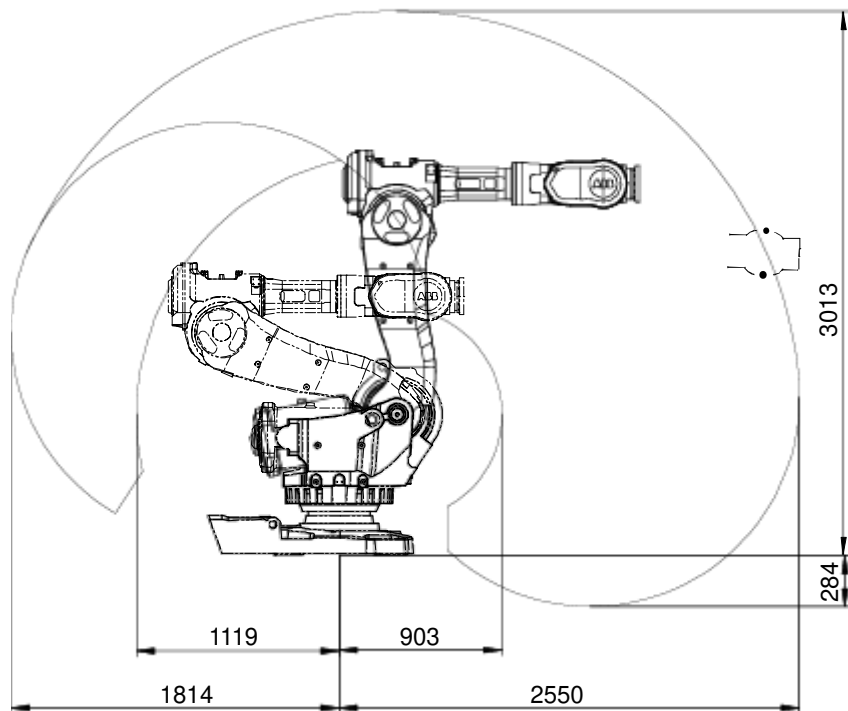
The extreme positions of the robot arm specified at the wrist center (dimensions in mm).
